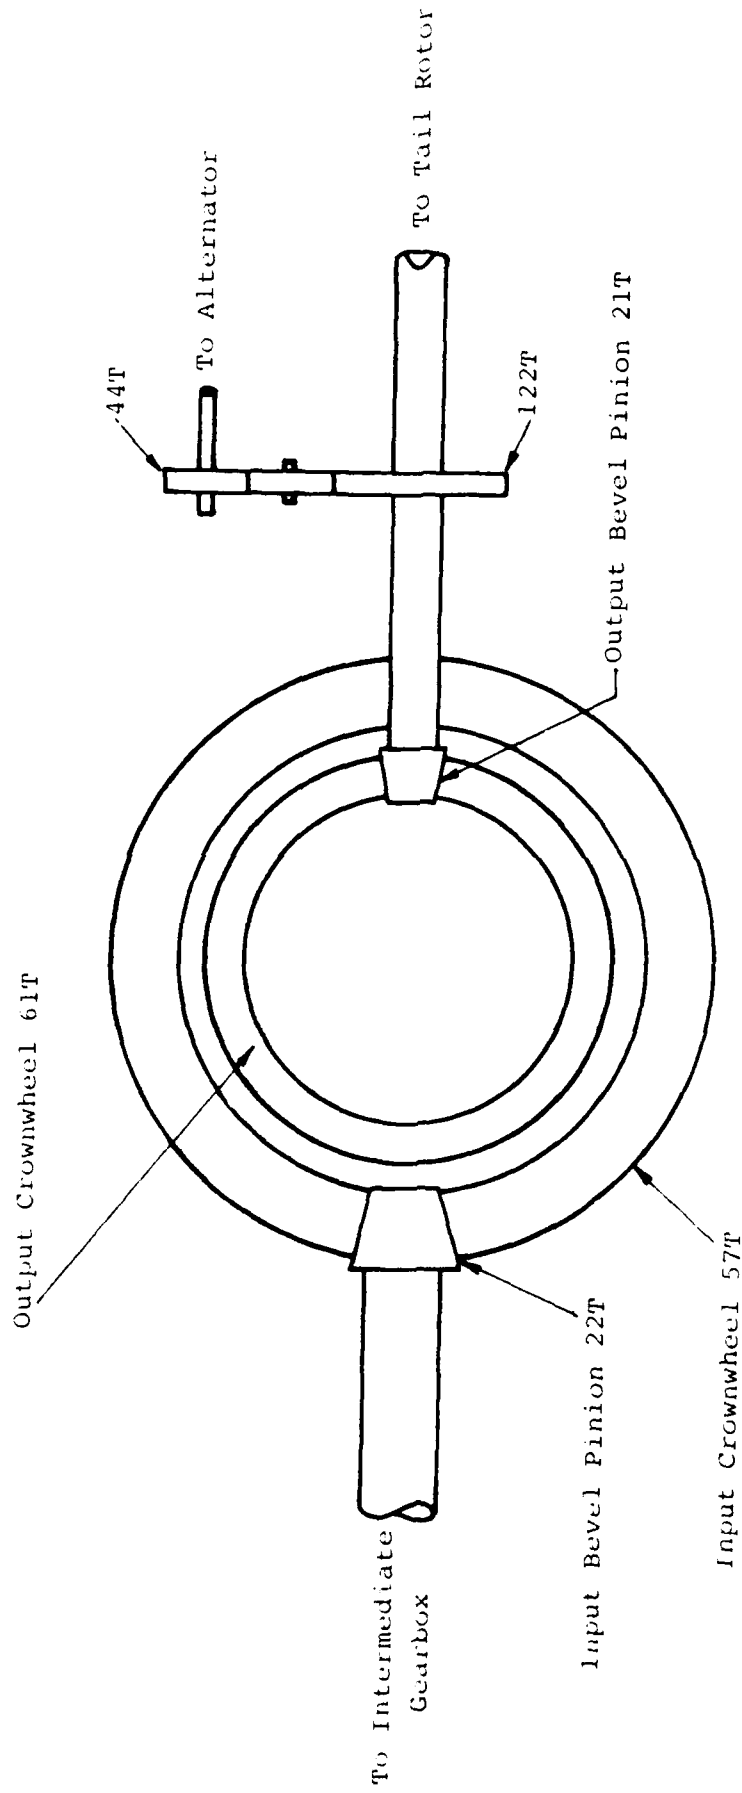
SOME MAJOR GEARS IN WESSEX MAIN ROTOR AND ACCESSORY GEARBOXES
